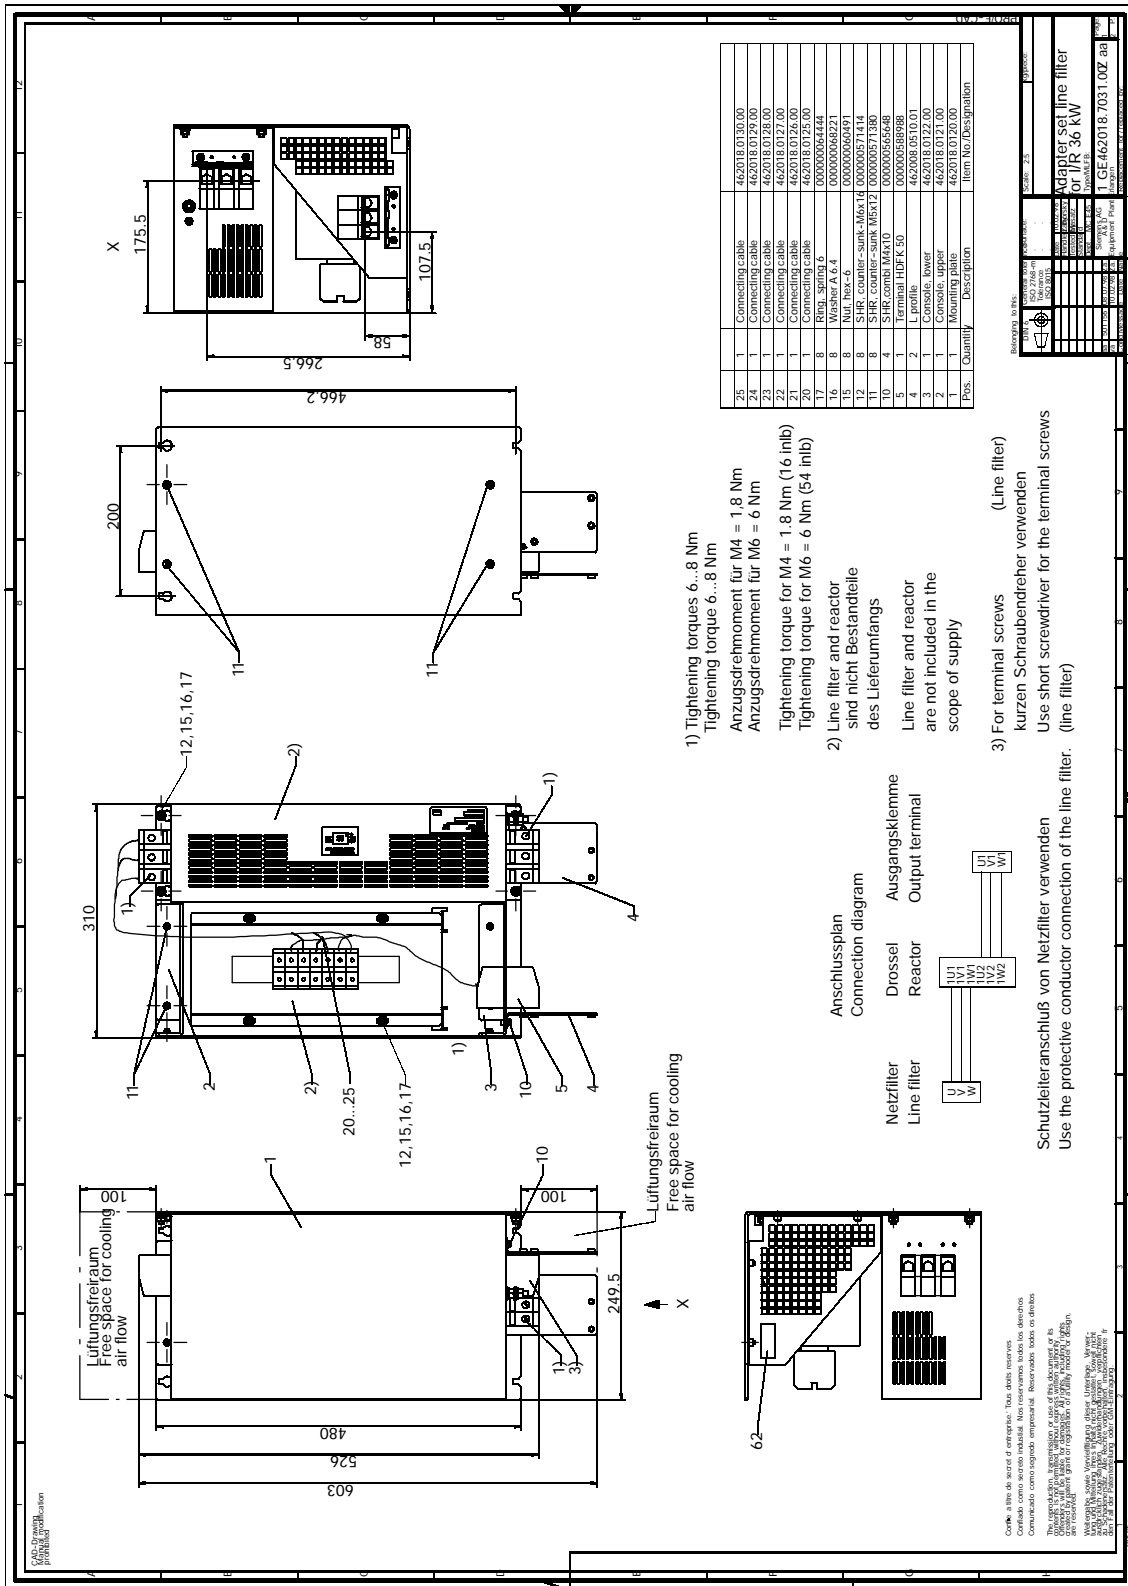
Adapter set, line filter for I/R module 36 kW, 6SN1162-0GA00-0CAx; dimension drawing
